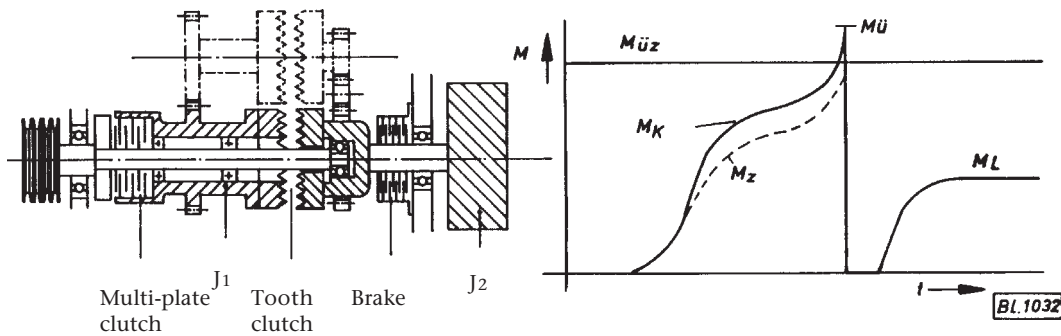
Drive layout with tooth and multi-plate clutch (Torques during engagement)
